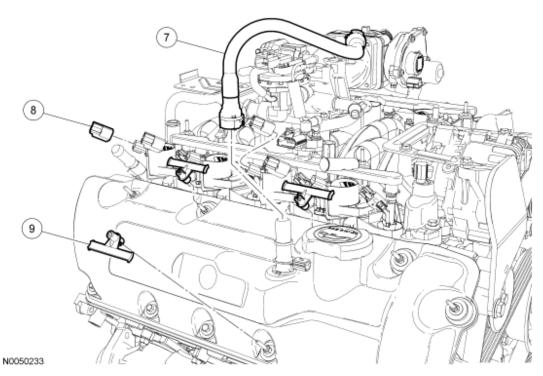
Exploded View Of Right Hand Valve Cover (3 Of 4) Courtesy of FORD MOTOR CO.
